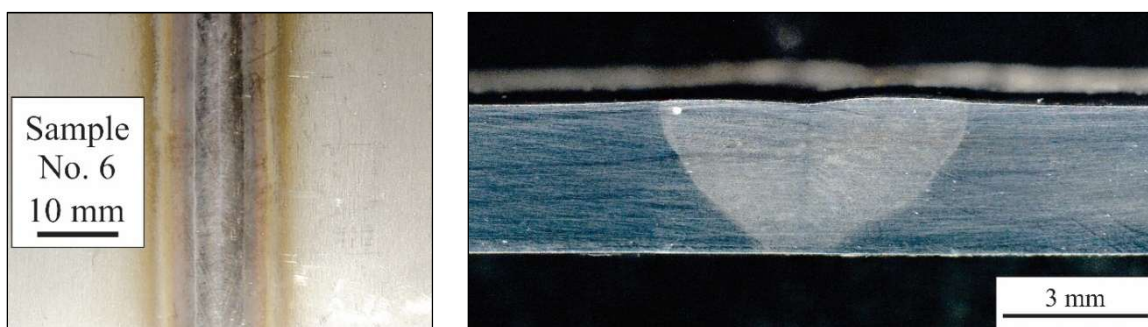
Specimen No 6 - TAG, 130 A, no filler material
